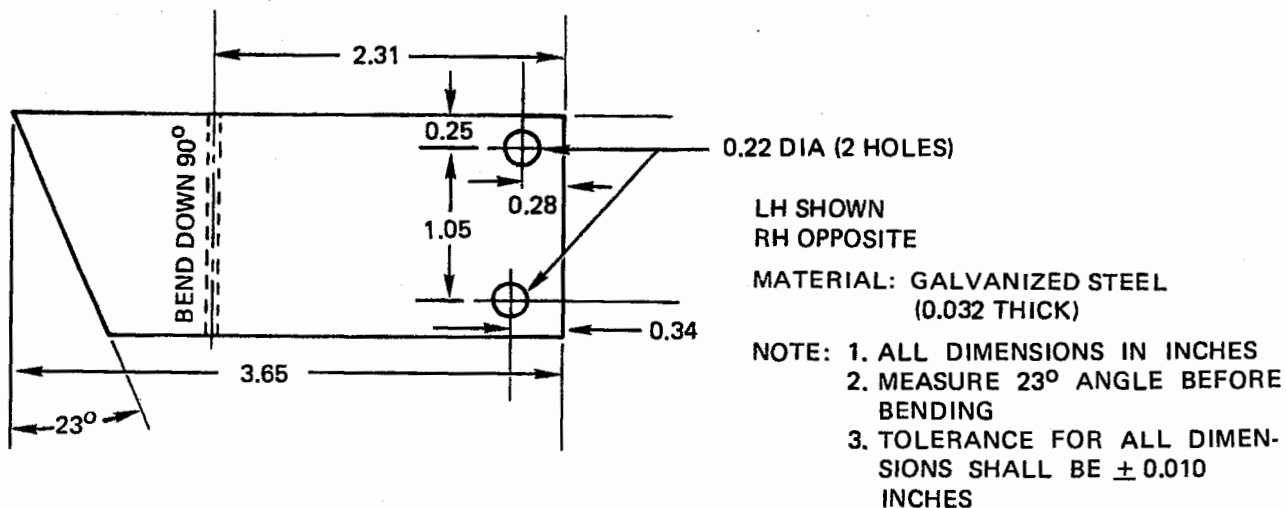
Main Landing Gear Uplock Switch Template Manufacture
